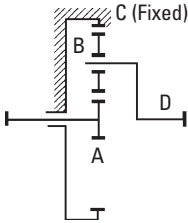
(a) Planetary Type Planetary Gear Mechanism
